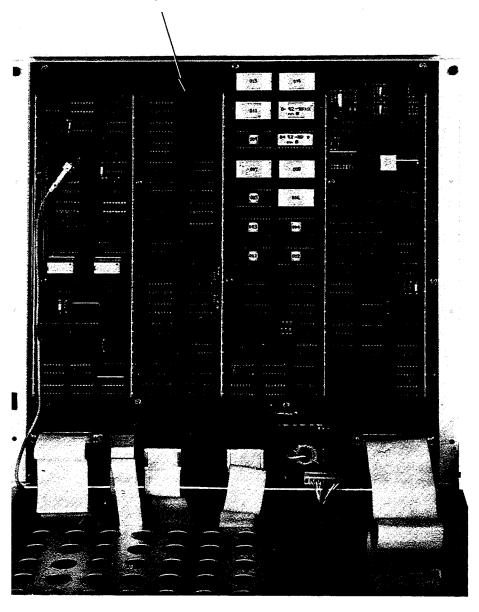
Assembly Locations (Sheet 2 of 4).
